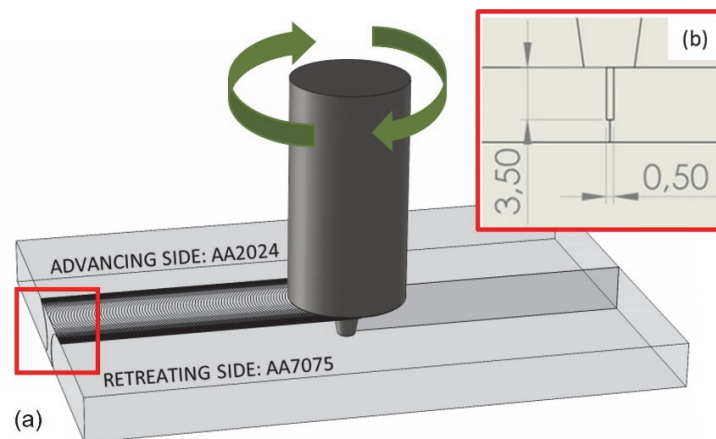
(a) Plates arrangement for joints production (b) Design of the groove machined on the adjoining sides of the plates (dimension in [mm]).
